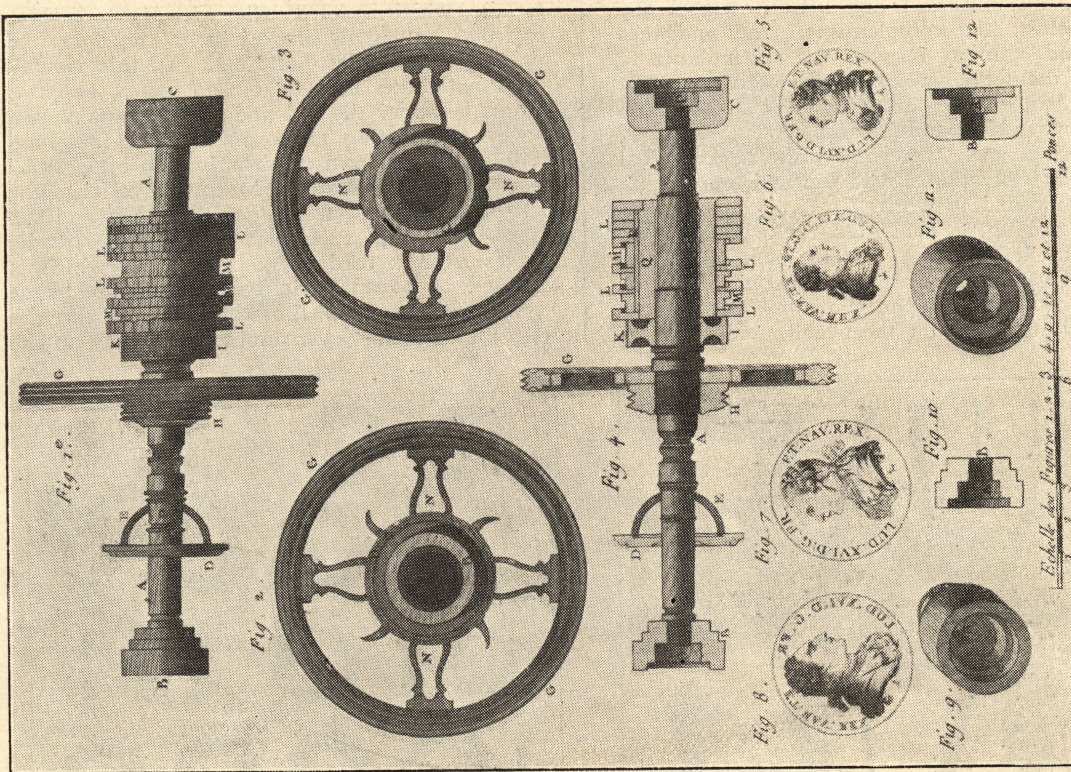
Plate V.—Details of Mandrel, showing Grouping of Rose Cams, Chucks and Cameo and Intaglio Medallions.
